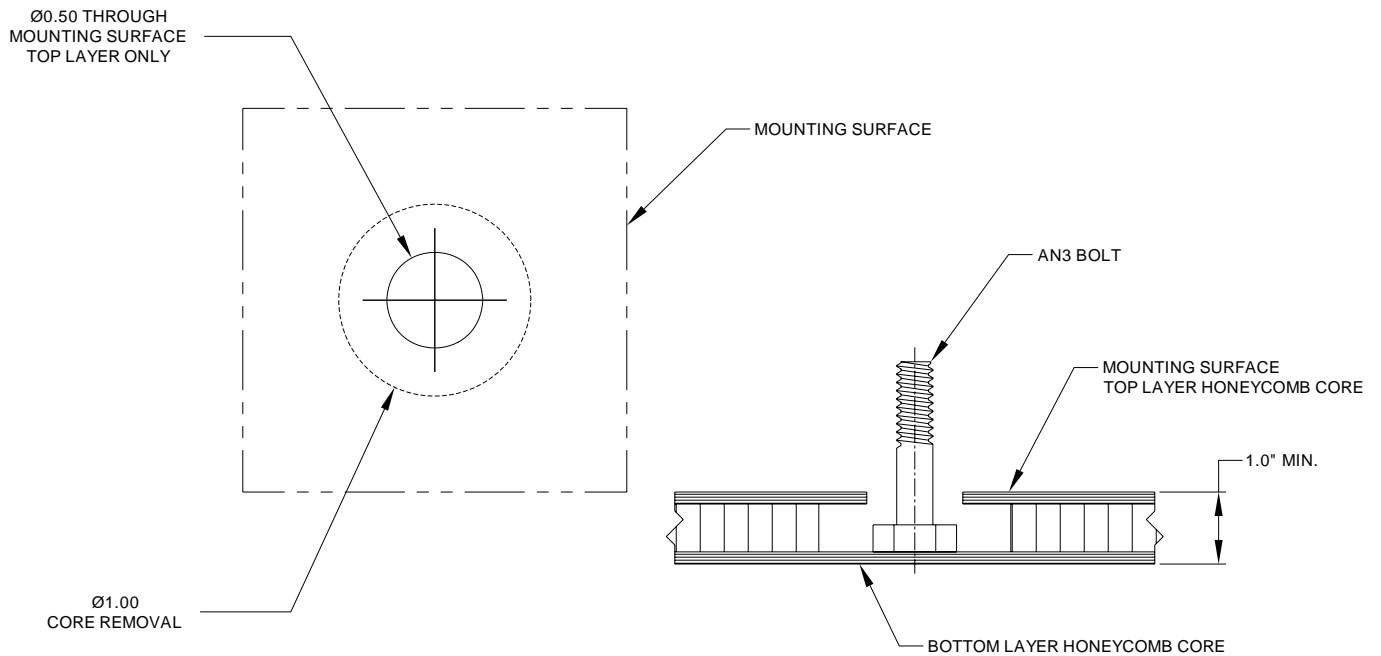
Mounting Bolt Preparation (Composite Aircraft)
